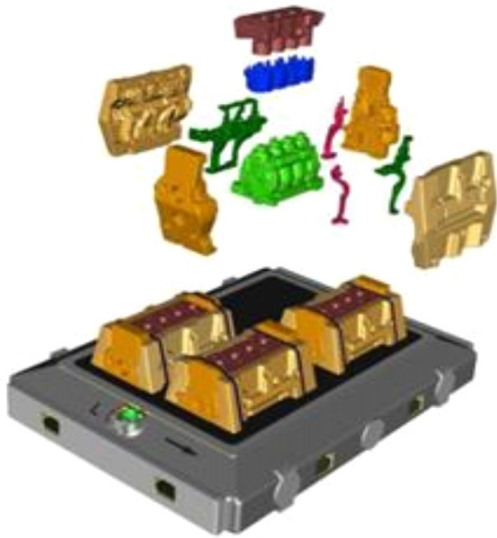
CAD model of typical core and mould package for a 4 on a bed cylinder block method
